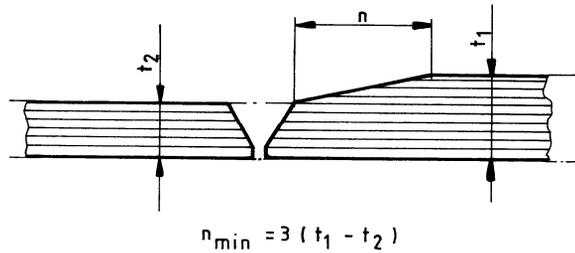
Edge preparation for welding plates of different thickness
